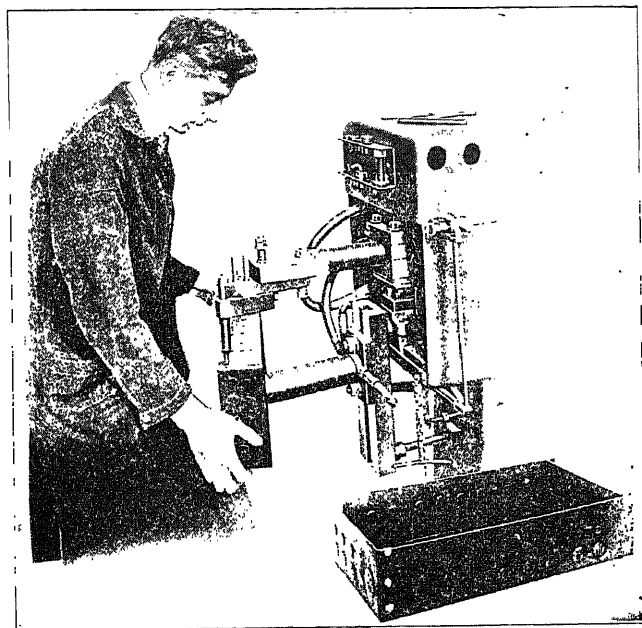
Spot-Welding a Sheet Steel Box.
